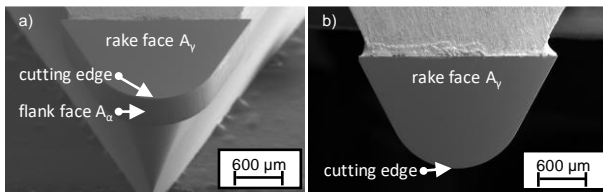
NPD turning tool with a) overall view and b) view of the rake face A_γ
